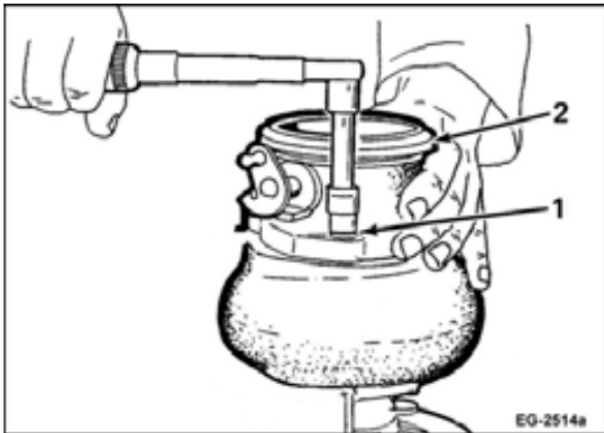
Installing EBP Control Valve (Late 1997 Model Year Shown)
